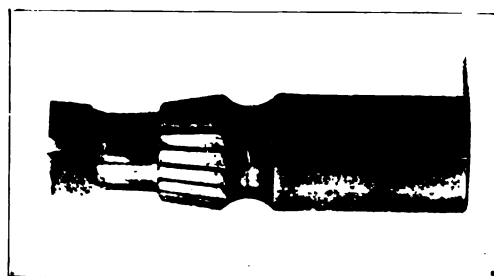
SECTION THROUGH PLUG AND SPECIMEN, DR. DRYSDALE'S TEST
